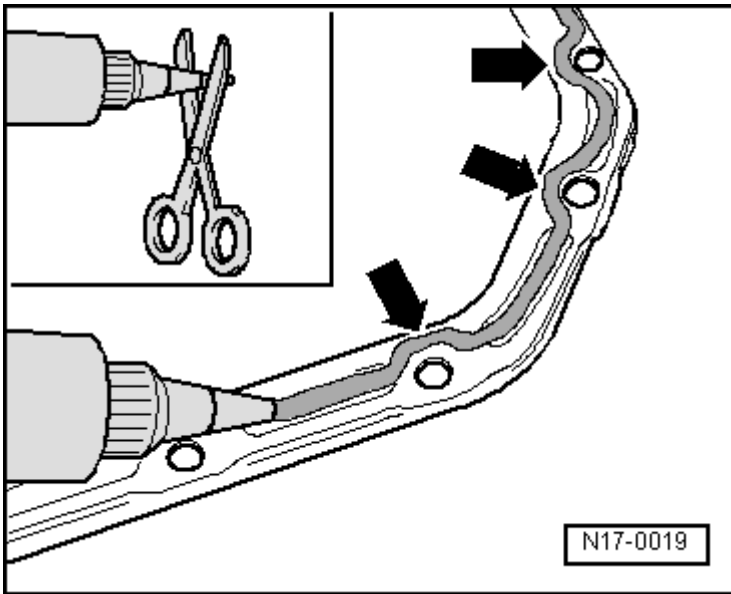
Cutting Off Tube Nozzle & Applying Silicone Sealing Compound To Oil Pan Sealing Surface
